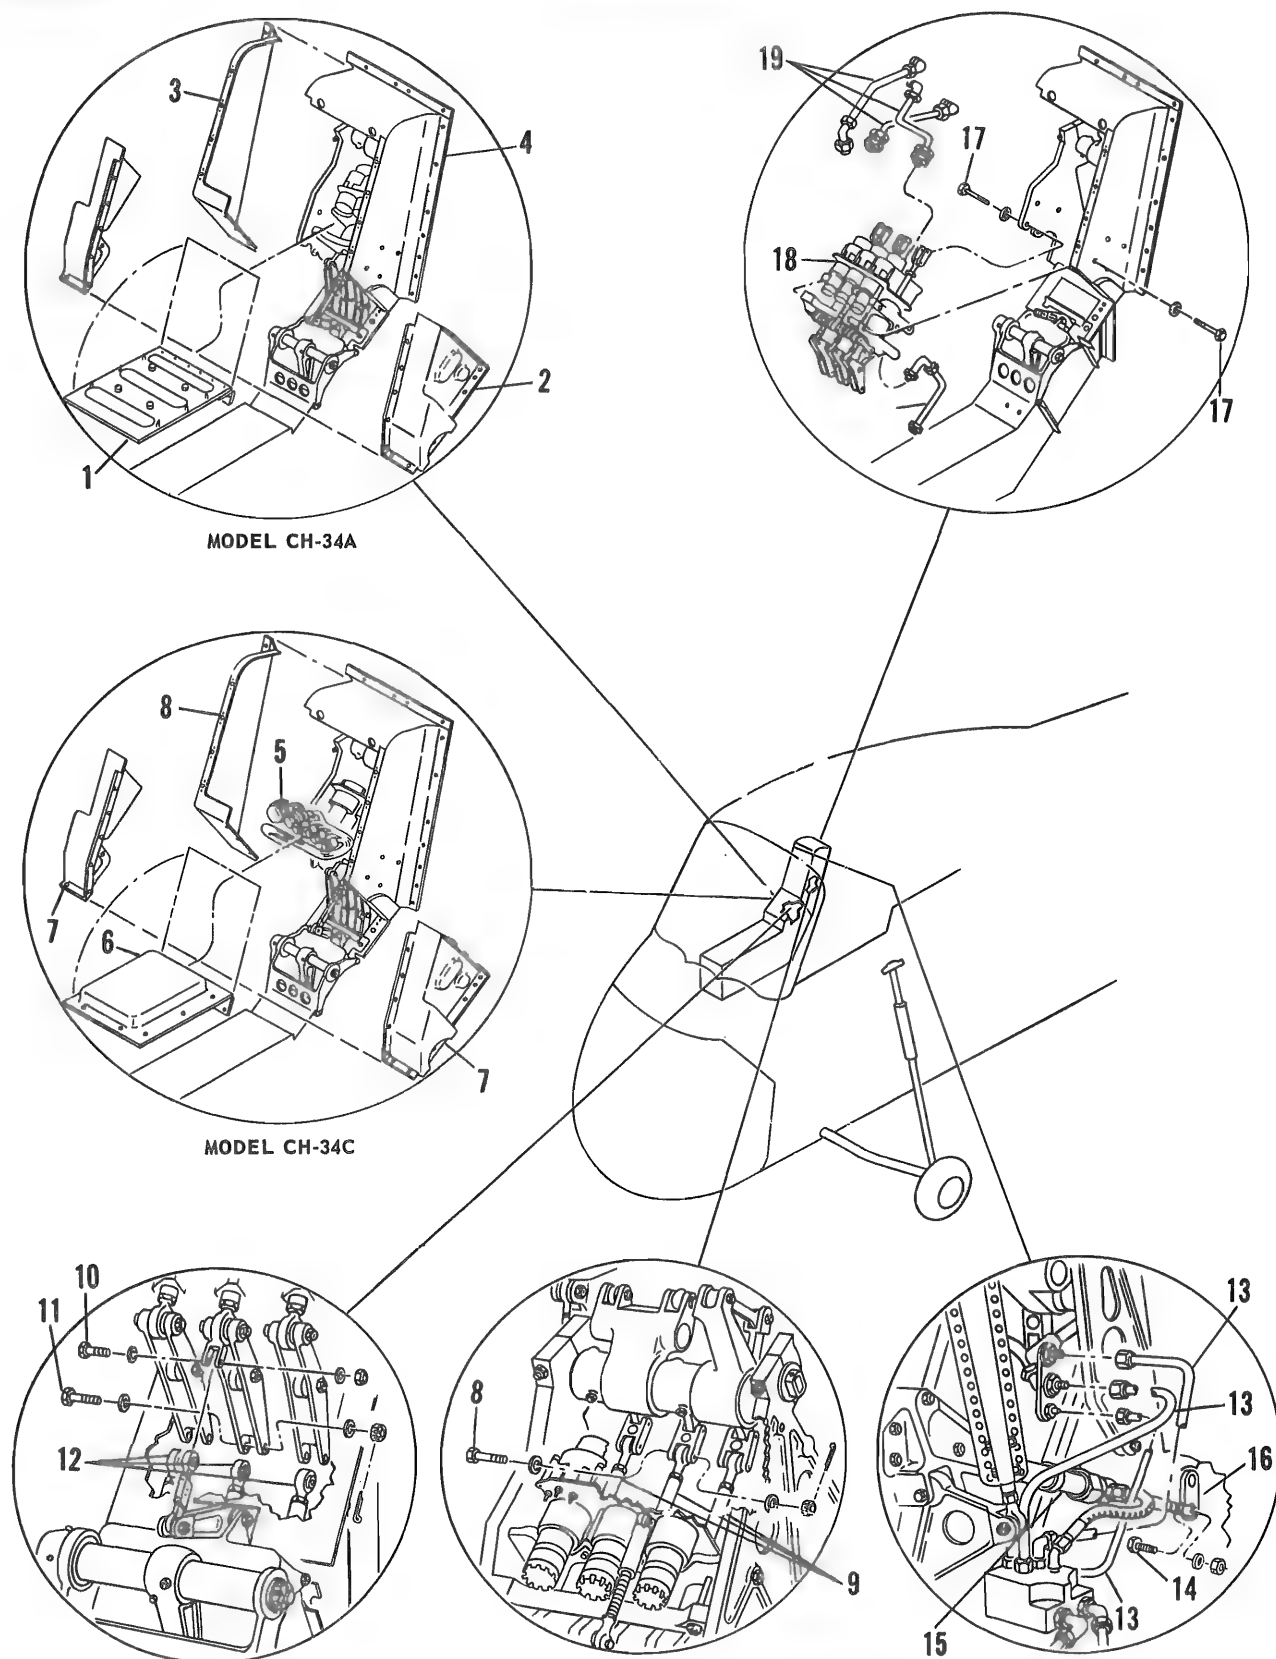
Main Rotor Auxiliary Servo Unit Removal (Sheet 1 of 2)
